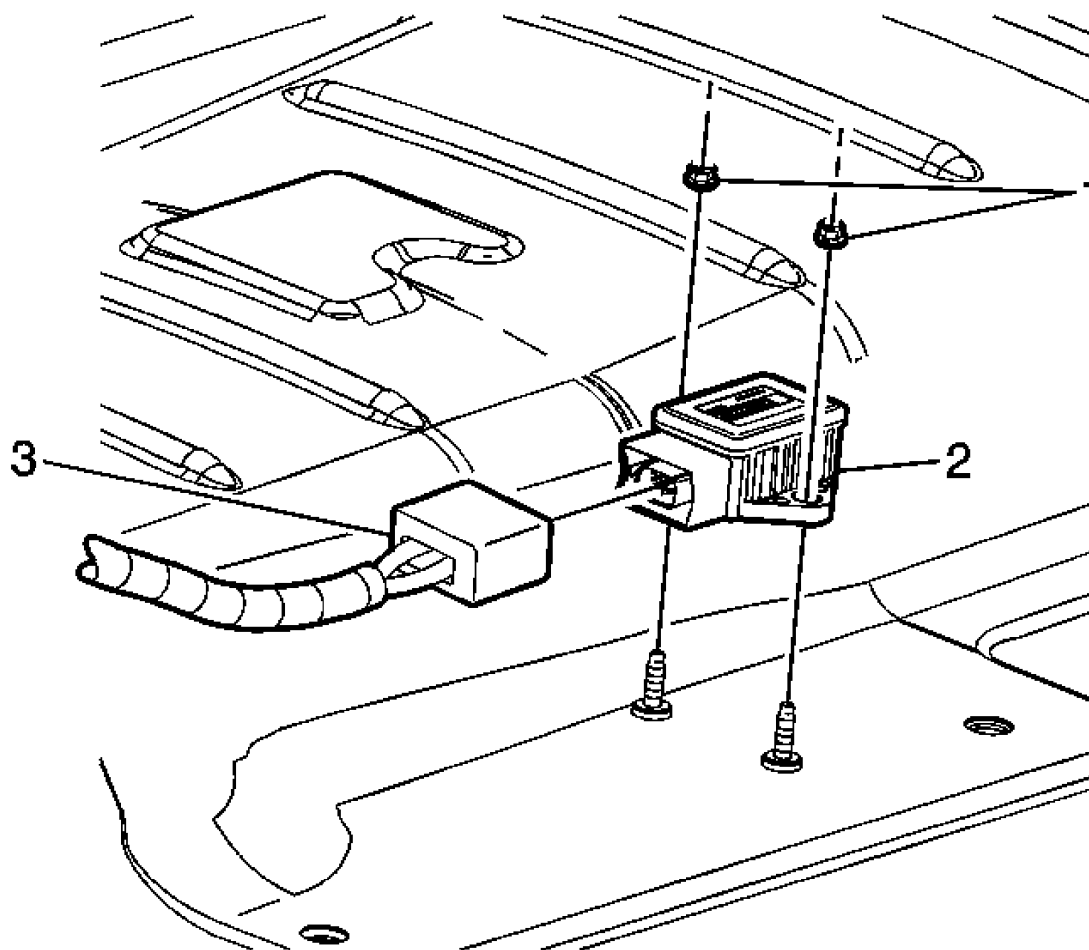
View Of Yaw Sensor, Electrical Connector & Retaining Nuts
